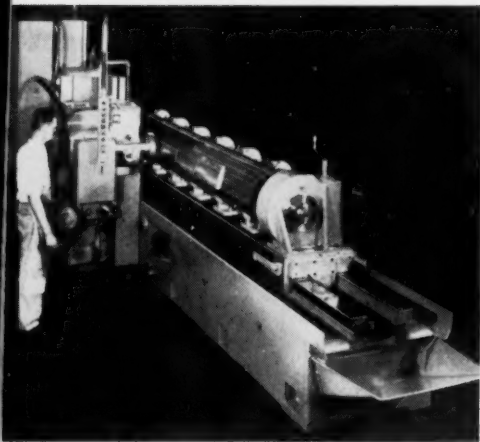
A 12-foot-long magnetic trunnion fixture installed on a 50-horsepower Rigidmil.
